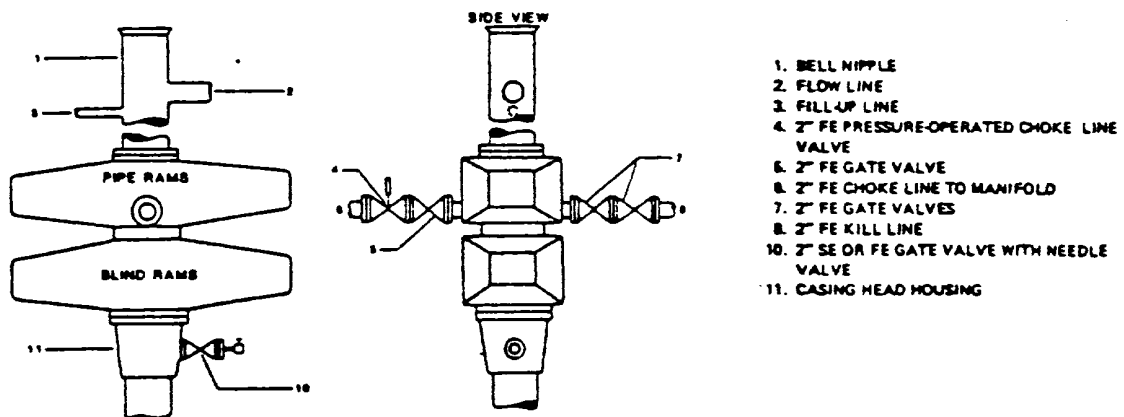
Standard Hydraulic Blowout Preventer Assembly
